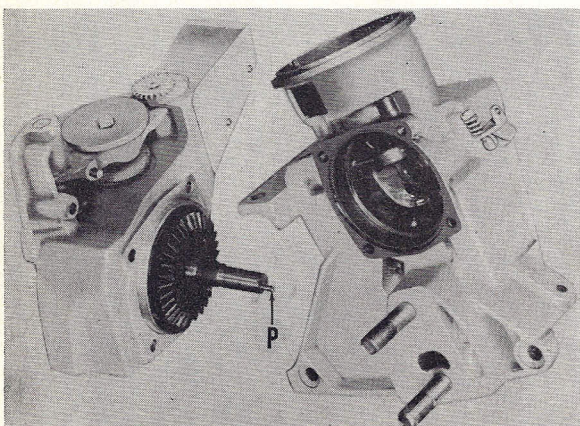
A — Partly disassembled view of BP-1 transmission. Note oil pump plunger (P).
